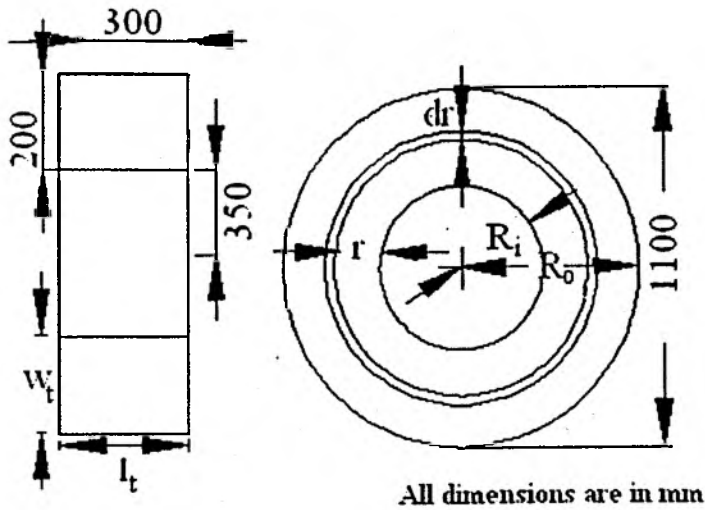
Design Dimensions of Thrower-cum-Blower
